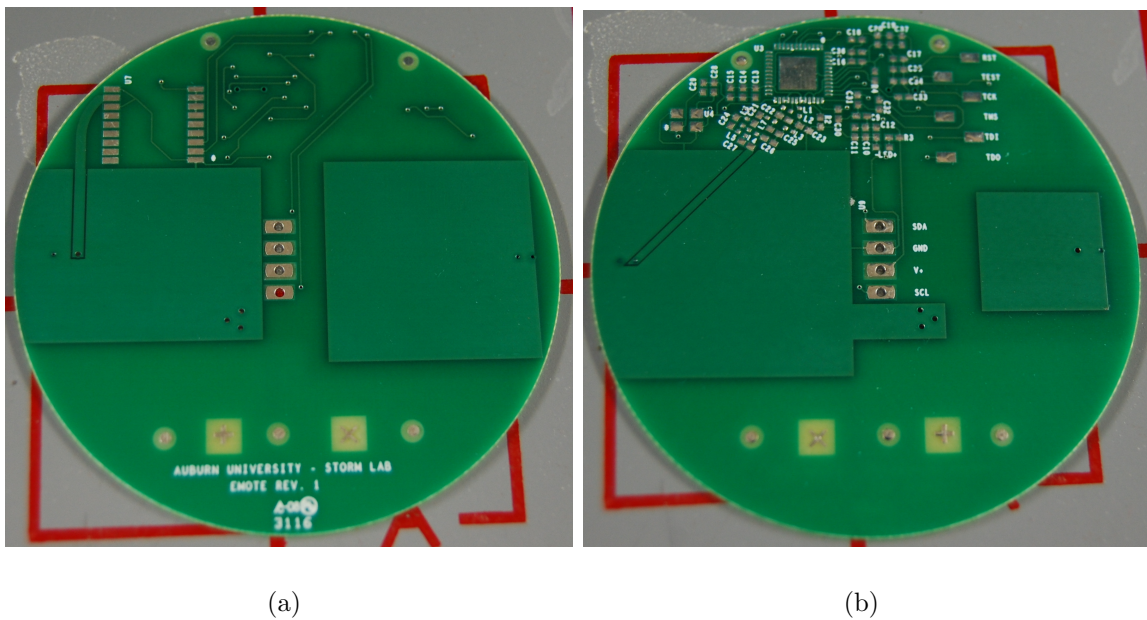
Bottom (a) and Top (b) of the Fabricated Antenna Board
